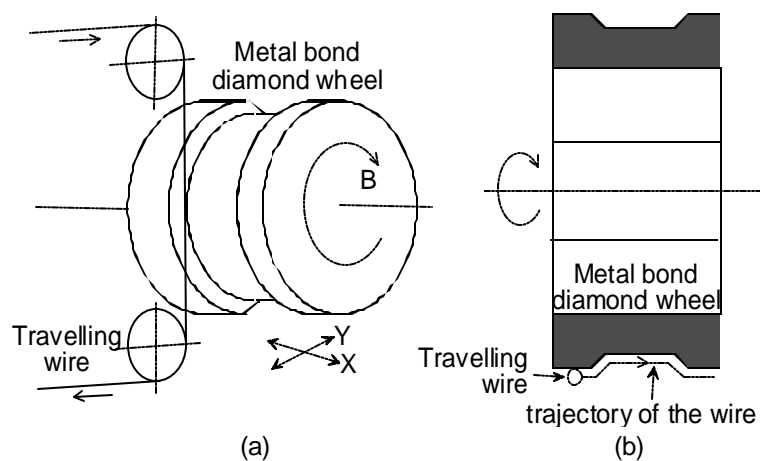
Wire EDM of metal bond diamond wheel, (a) configuration of the operation, (b) top view of the trajectory of the wire
